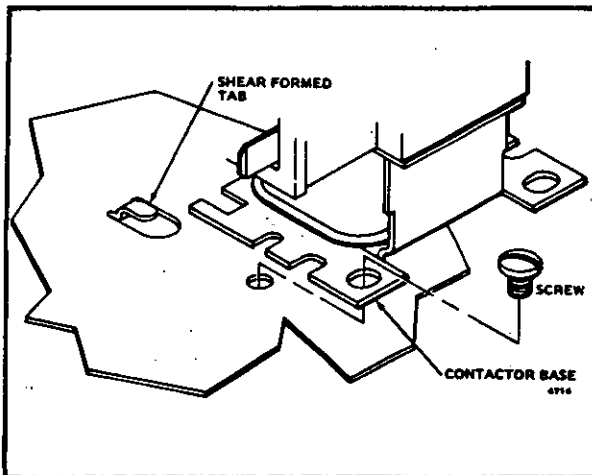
MOUNTING RELAY ON PANEL WITH SHEAR-FORMED TAB AND ONE SCREW.
